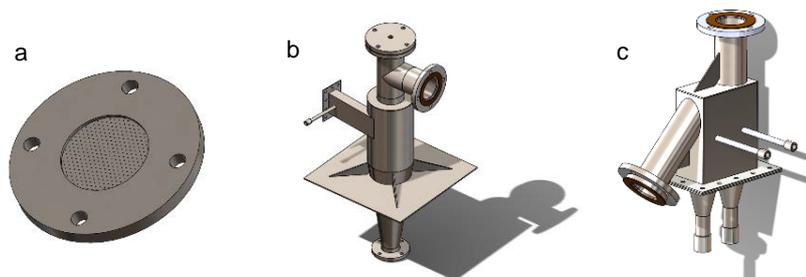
3D CAD views from Solidworks<sup>®</sup> of: distributor plate (a), cyclone (b) and loop seal valve (c)
